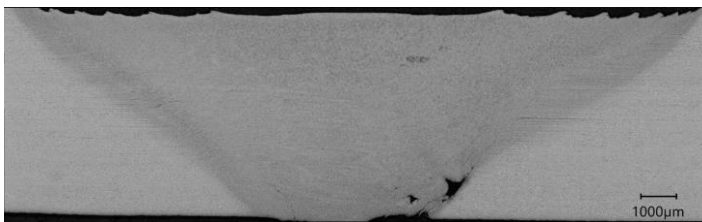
A friction stir welded butt joint in steel showing a tunnel defect at the lower advancing side.
